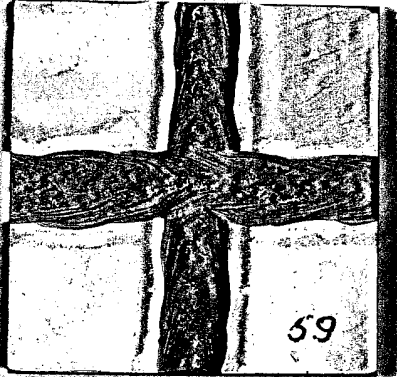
Welded Specimen of 1/8" Thick Sheet
